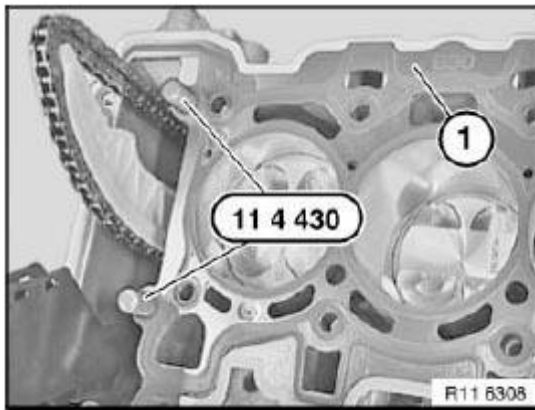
Identifying Special Tool (11 4 430) And Identification Marks On Cylinder Head Gasket (N54)
